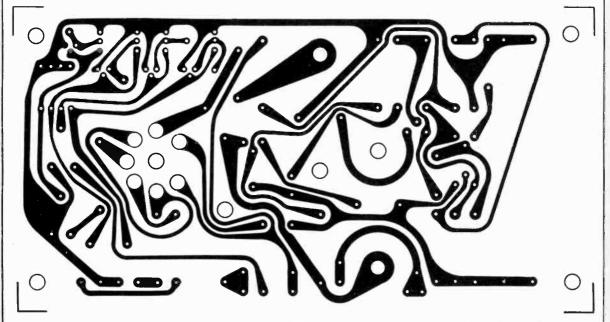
Printed circuit master (full size) suitable for all versions of the gas/smoke sensors
